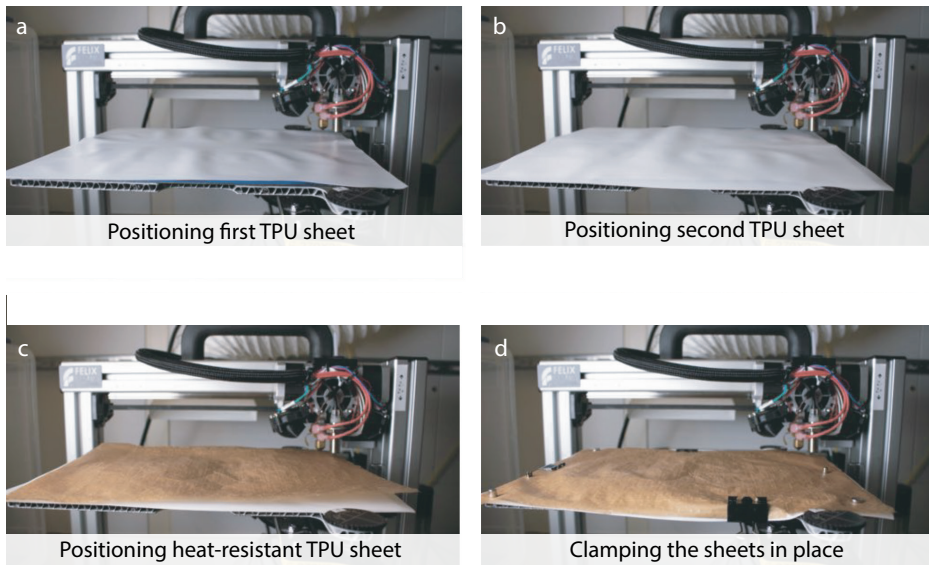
Fabrication details for the heat sealing procedure of the TPU sheets used in the N.O. valve. (a-b) The TPU sheets are first cut and positioned on the print bed of the modified 3D printer. A heat-resistant sheet (commercial baking paper) is then positioned (c) and fixed (d) on top of the TPU sheets using clamps and magnets.
